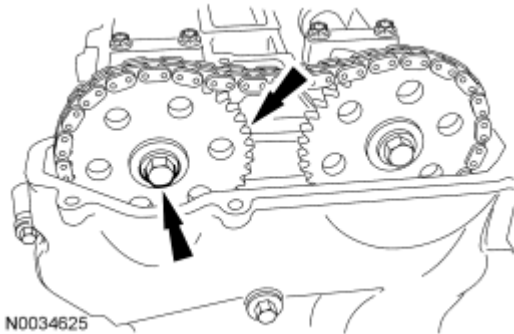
Locating Exhaust Camshaft Drive Gear Bolt
